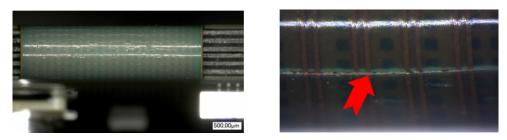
Solder mask cracks formed in the folded region of the PS-MCK.
